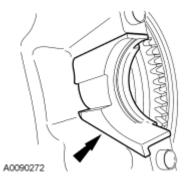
Locating Starter Motor Isolator Courtesy of FORD MOTOR CO.
